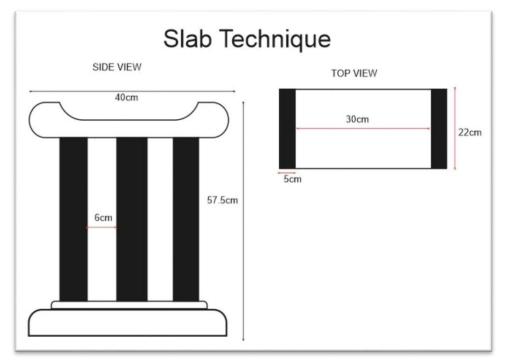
side and top view of designed garden stool with the slabbing technique
